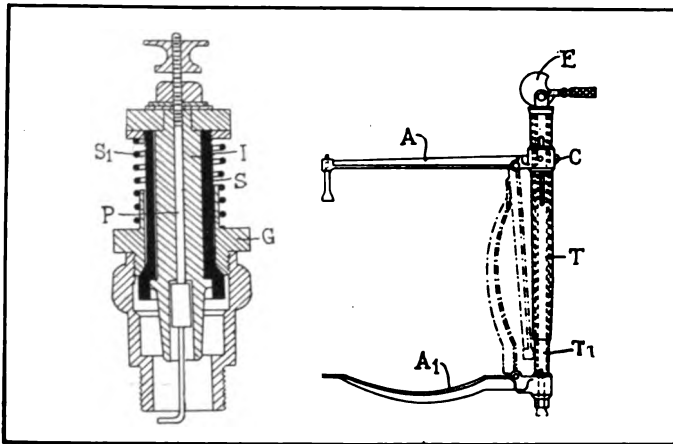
Wallace-Green plug. Fig. 11—Zehnder valve tool
